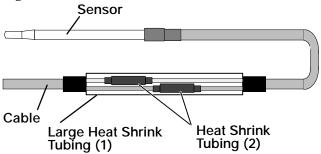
Sensor and Cable Assembly (RRS, RTS, SRS or STS)
